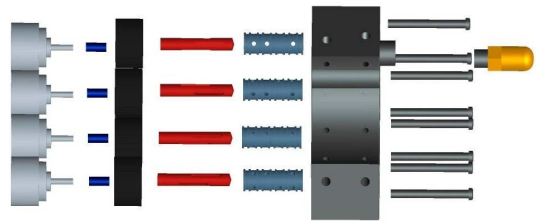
Exploded view of four servovalve assemblies which are contained in the valve bank. From left to right the components are: servomotors (grey), shaft couplings (blue), housing and thermal isolators (black), valve spools (red), valve sleeves (blue), manifold (black), fasteners (grey), and muffer (gold).
